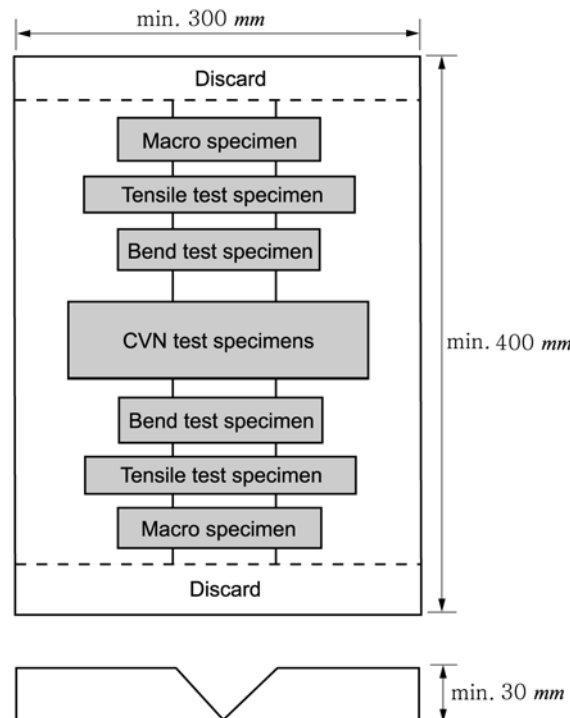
Test Sample for Butt Welding Test
